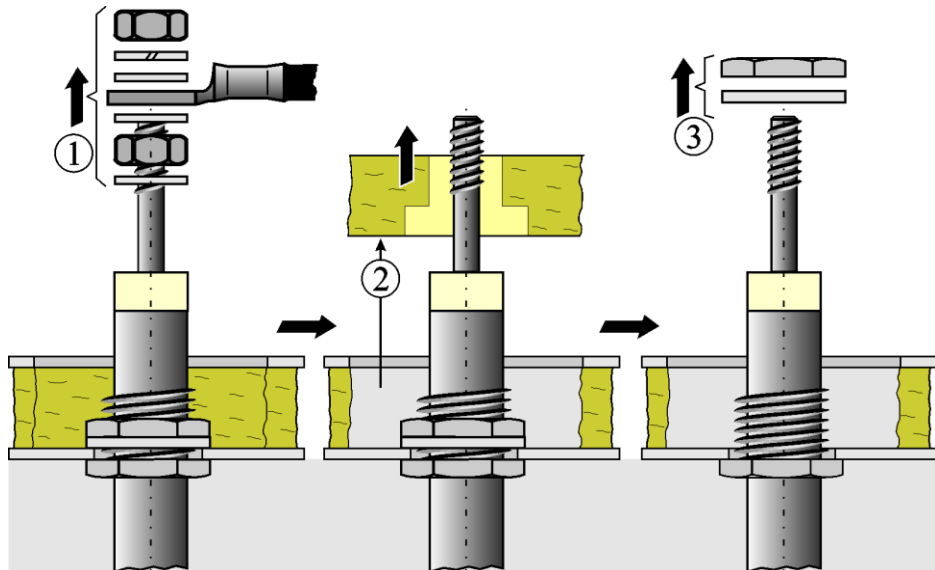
Undoing the screw connections of the heating element (similar to picture)
